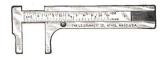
NO. 425. POCKET SLIDE CALIPER
